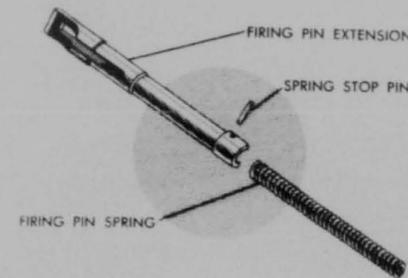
Firing Pin Extension Assembly—Exploded View.
